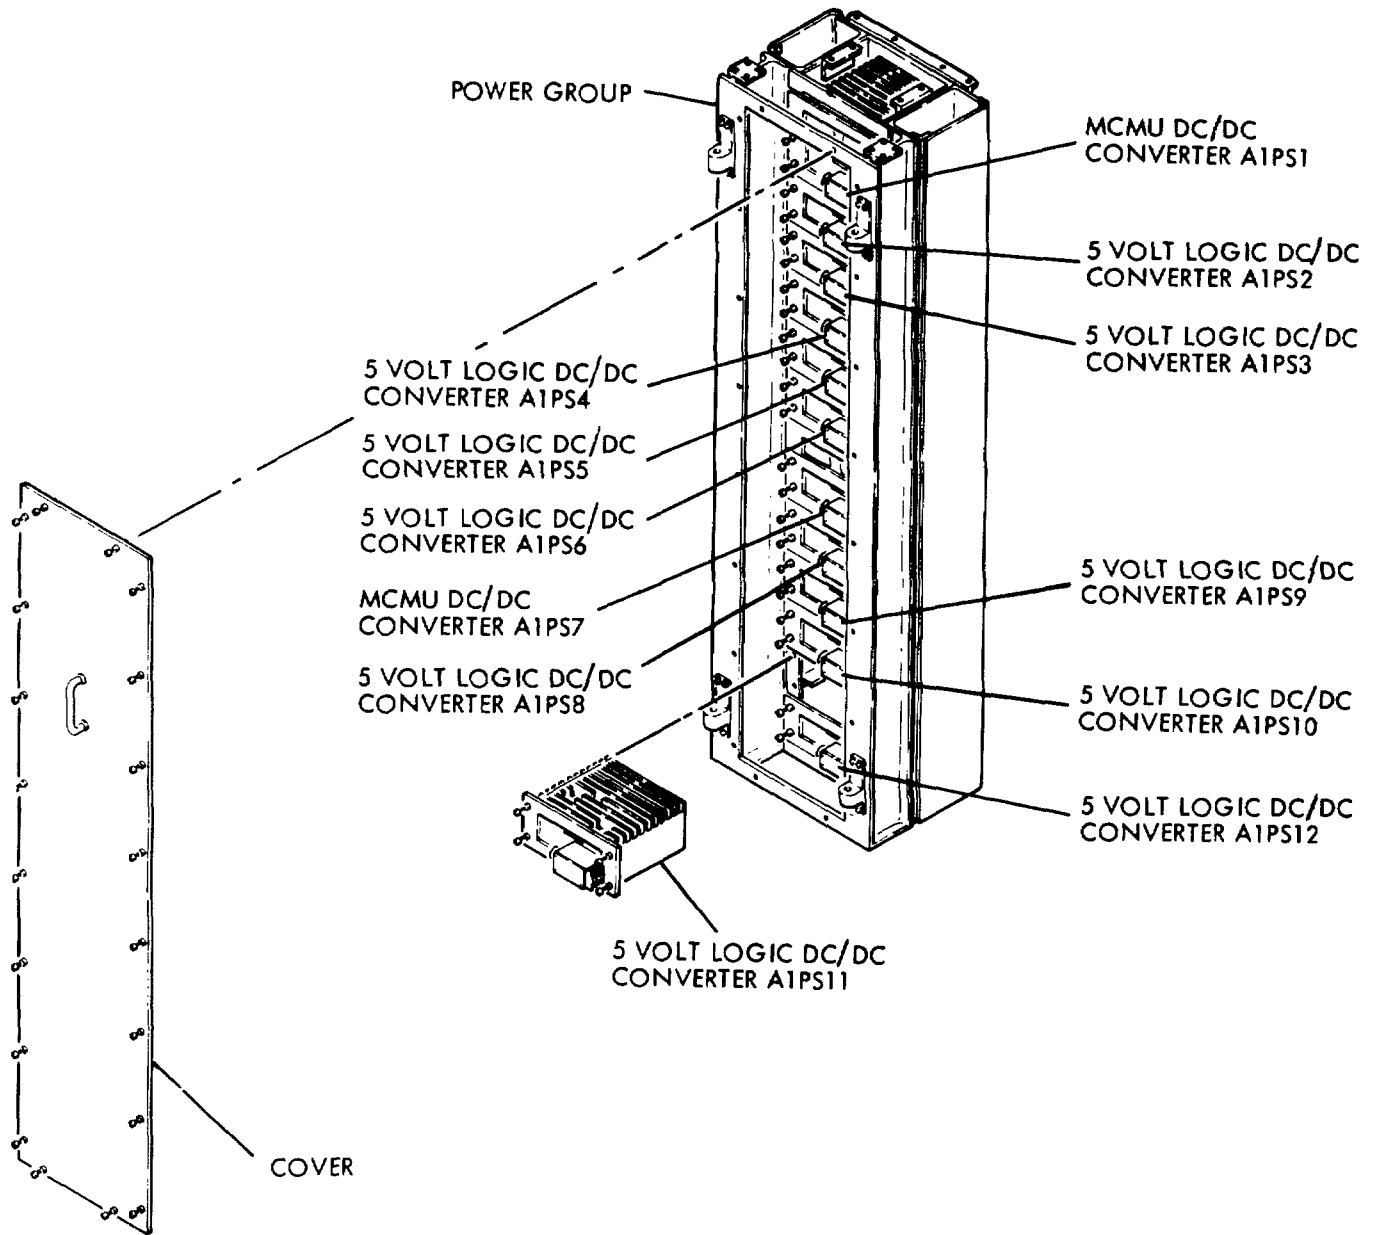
Message Switch ADP Assembly (Sheet 3 of 5).
